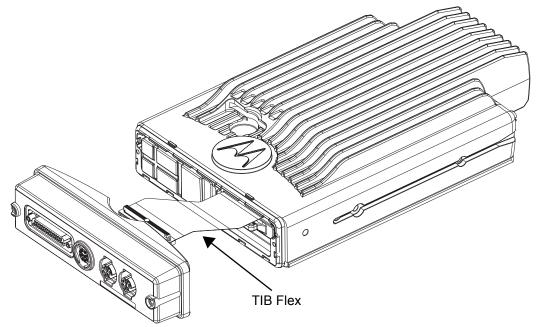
Removing the Flex (Transceiver Interface Board Connector)
